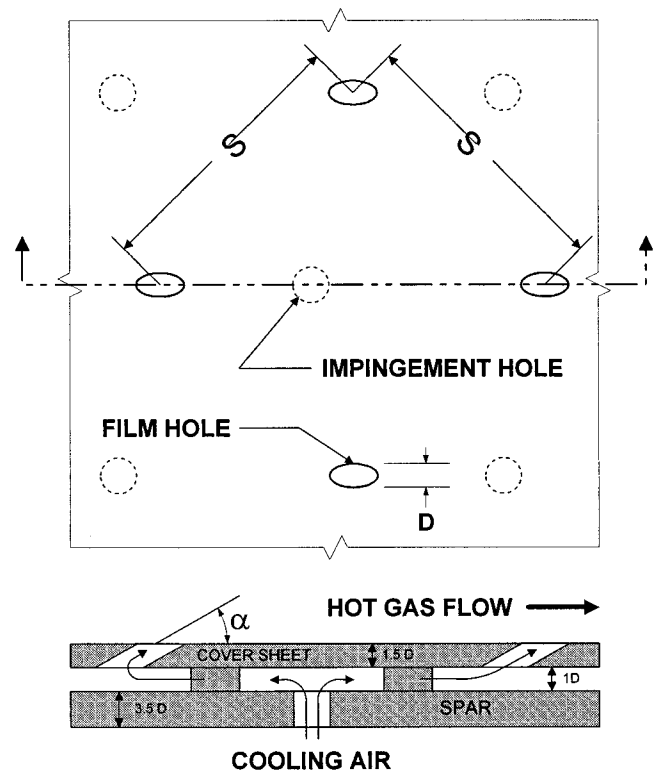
Lamilloy hole geometry consists of staggered arrays of impingement and film holes.
